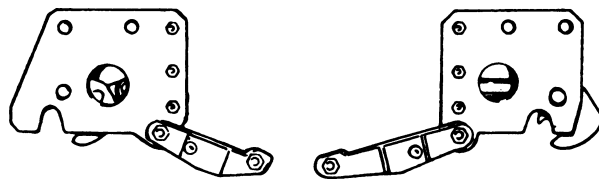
Aero 1A bomb rack adapter assembly.
